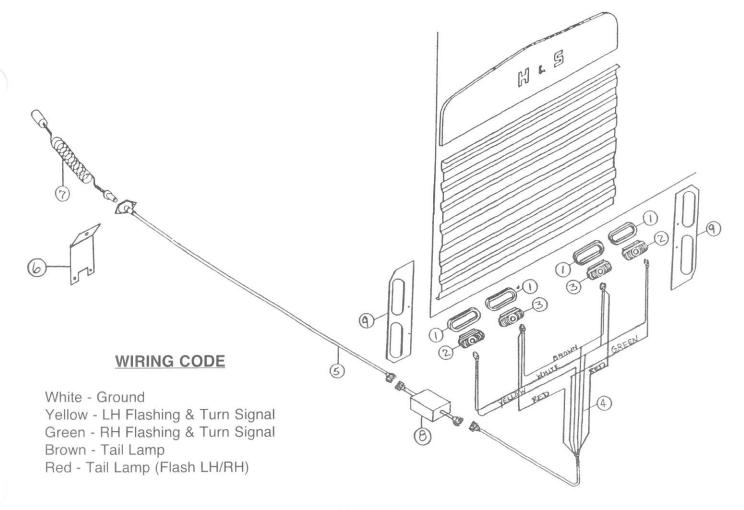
H D 7+4 TWIN AUGER INDUSTRIAL FRONT & REAR SELF-UNLOADING FORAGE BOXES LIGHT ASSEMBLY
